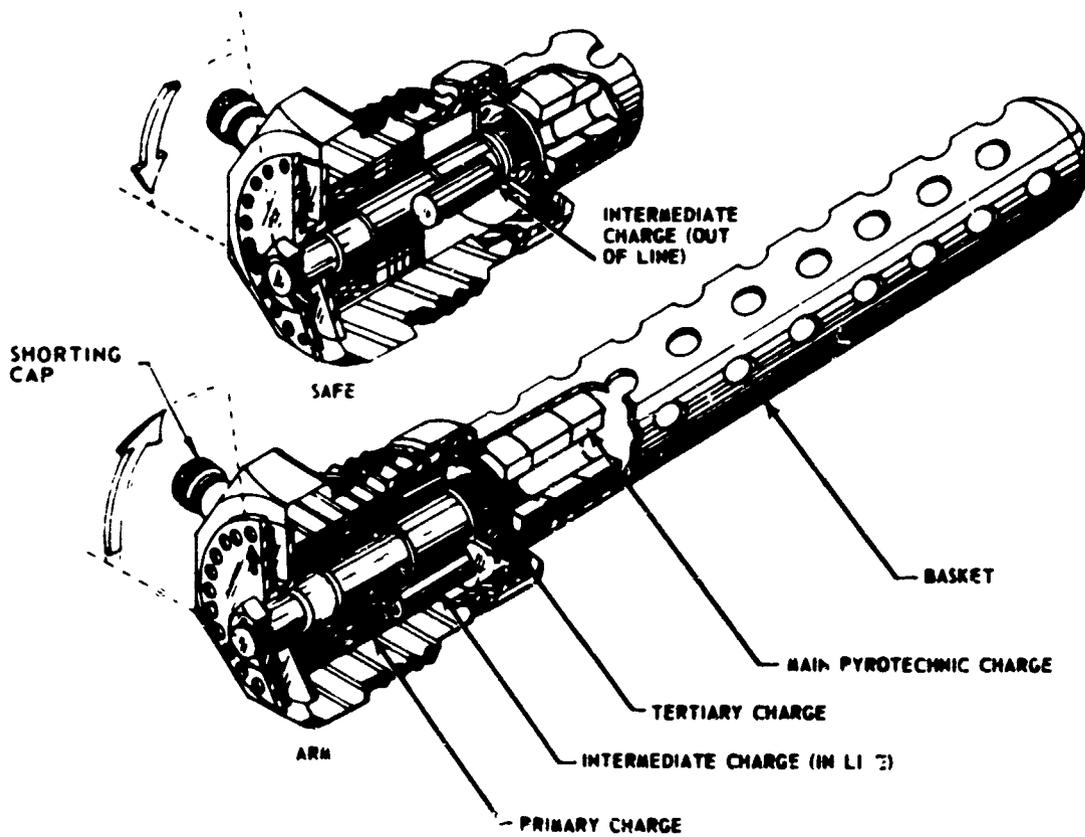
Igniter MK 265 Mod 0, Cutaway
